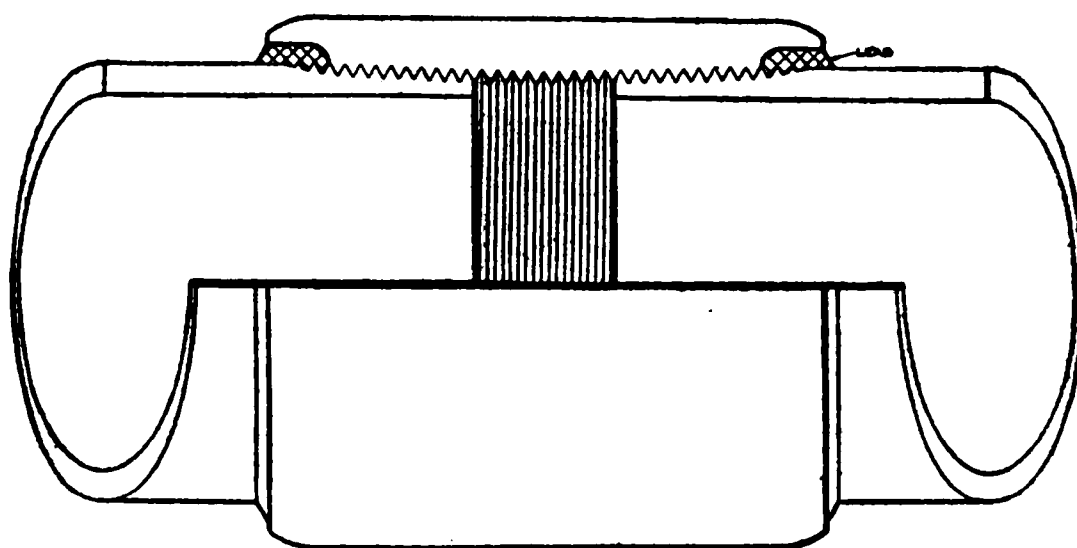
Typical Section of Air Line Pipe Coupling and Joint
